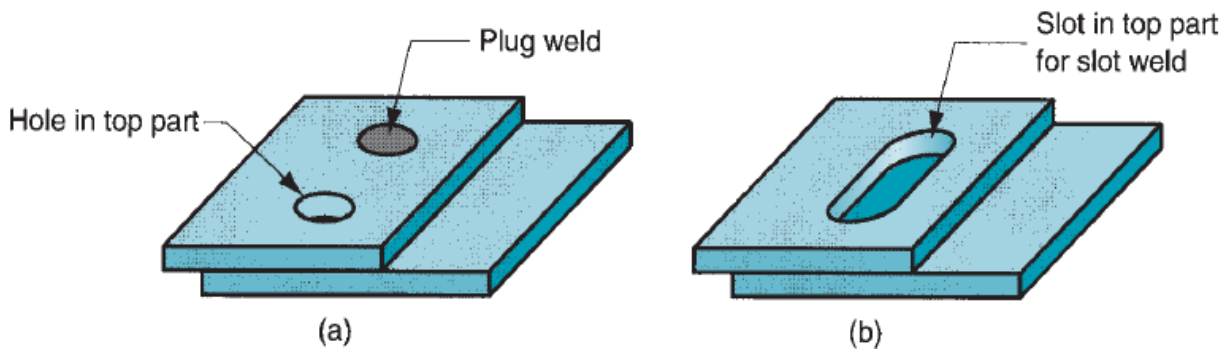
(a) plug weld, and (b) slot weld
